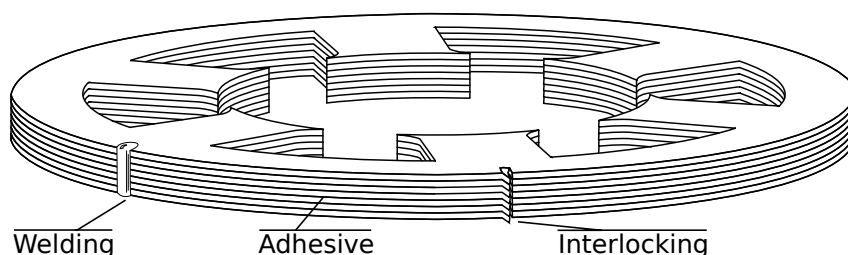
Magnetic steel sheet stack, with three common joining techniques: welding, adhesives and interlocking.
